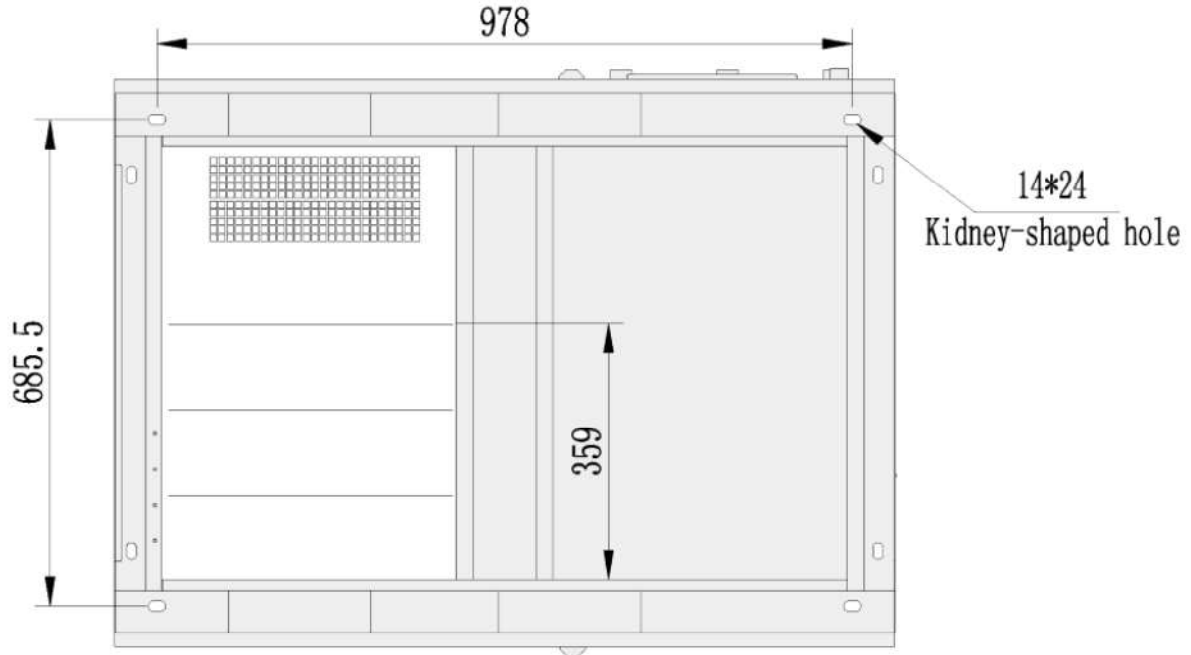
PWS1-500K rack wiring hole in bottom view
